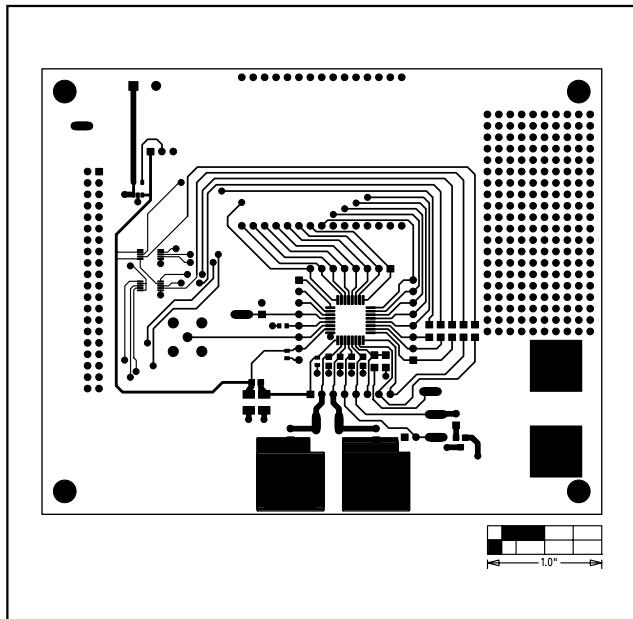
MAX1494 EV Kit PC Board Layout—Component Side
